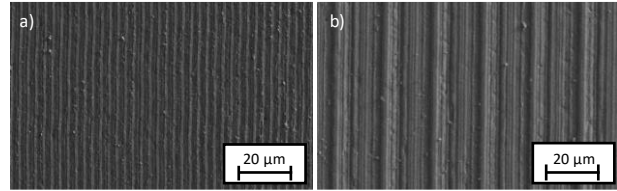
SEM-images of machine surfaces, a) finish cut and b) rough cut
